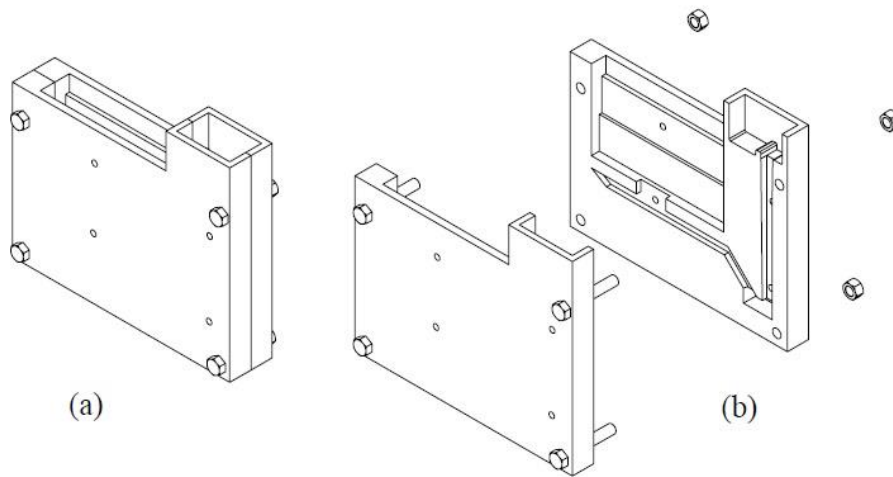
(a) A schematic diagram of the assembled permanent mould used to produce stepped bar castings. (b) an exploded view of the mould.
